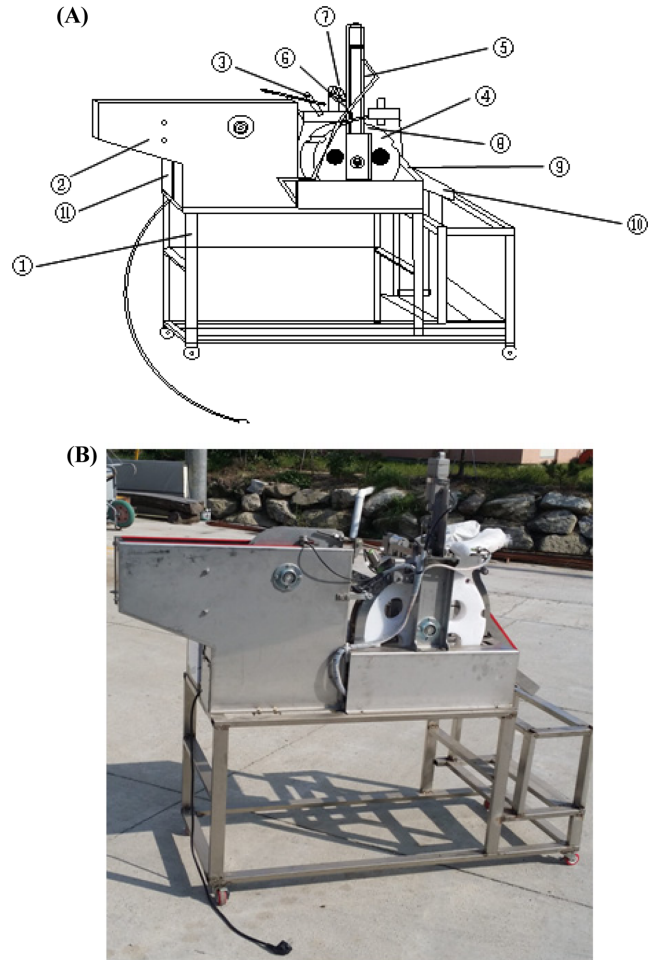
A schematic view (A) and a photo (B) of jujube seed removal test equipment. ① main frame, ② jujube supply plate, ③ near sensor, ④ rotating tray, ⑤ jujube holder, ⑥ cutter and cylinder, ⑦ photo sensor, ⑧ seed discharge plate, ⑨ fail line up discharge plate, ⑩ cutting flesh discharge plate, ⑪ control box.
